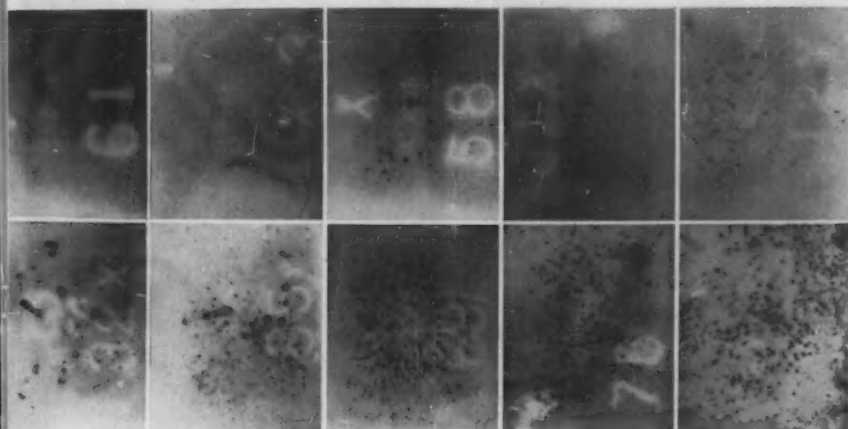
Ten x-ray standards were established to evaluate porosity in a 3500-lb casting. The best condition is shown at the upper left and is called Standard I; the lower right condition is the worst (Standard X).
